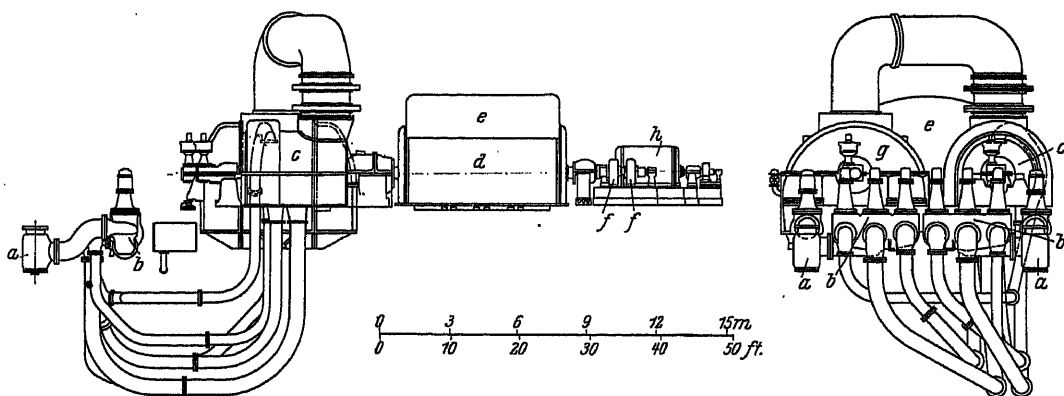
Westinghouse, arrangement of a 165,000 kw., 1800 R.P.M., two-casing high-pressure turbine
